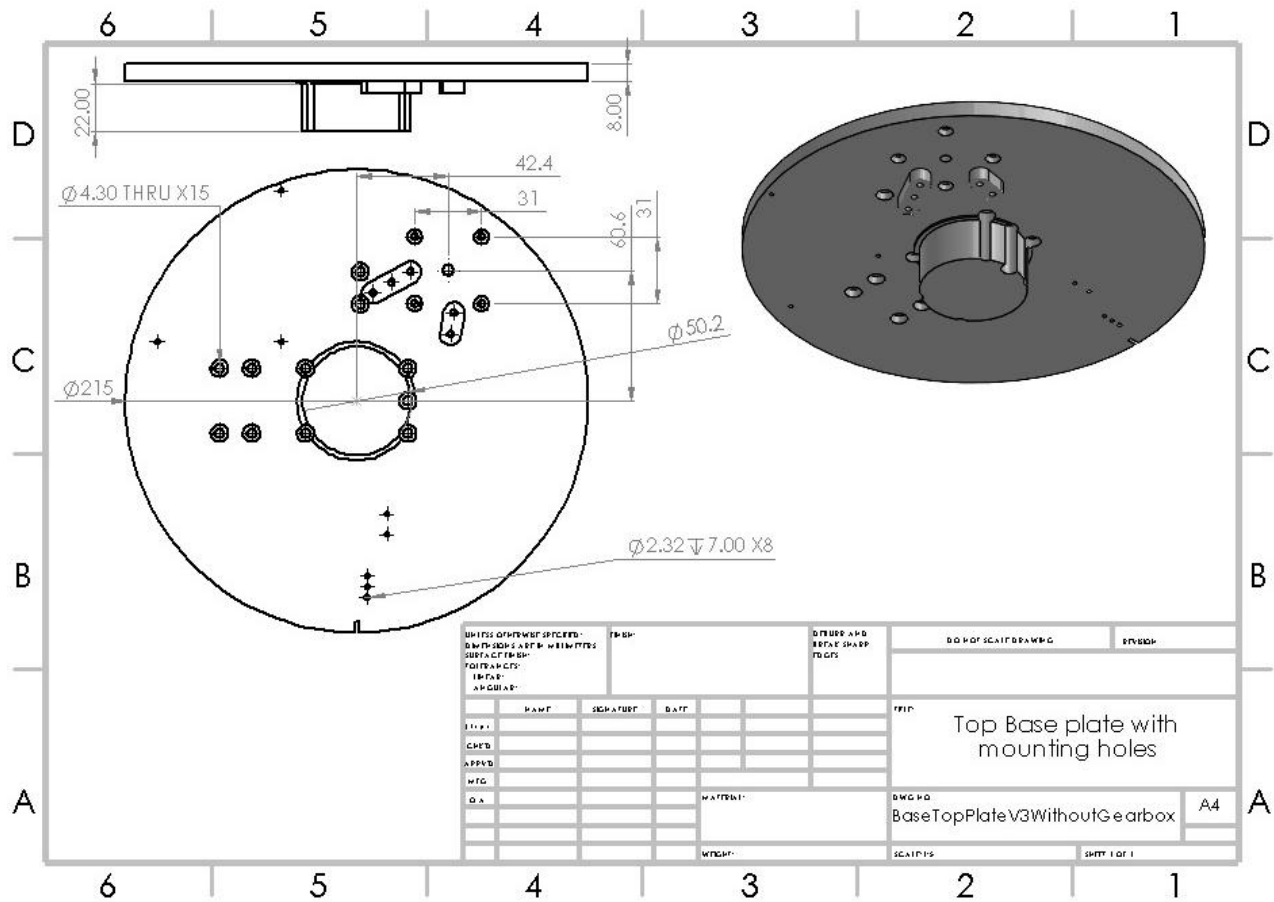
Top Base Plate with press-fit bearing attachment engineering drawing
